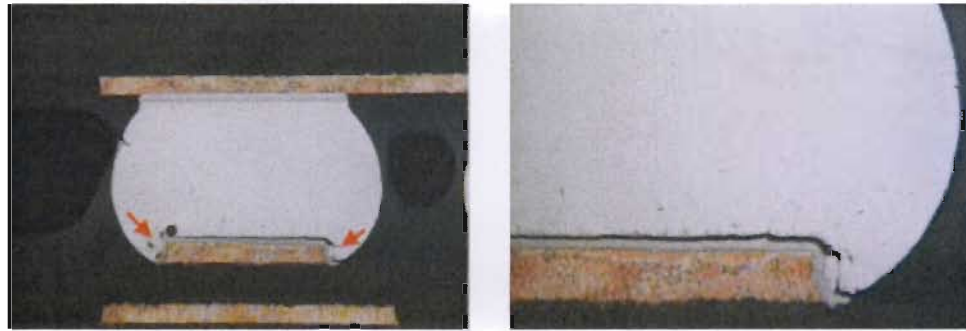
Solder joint fracture near the board-side IMC layer
